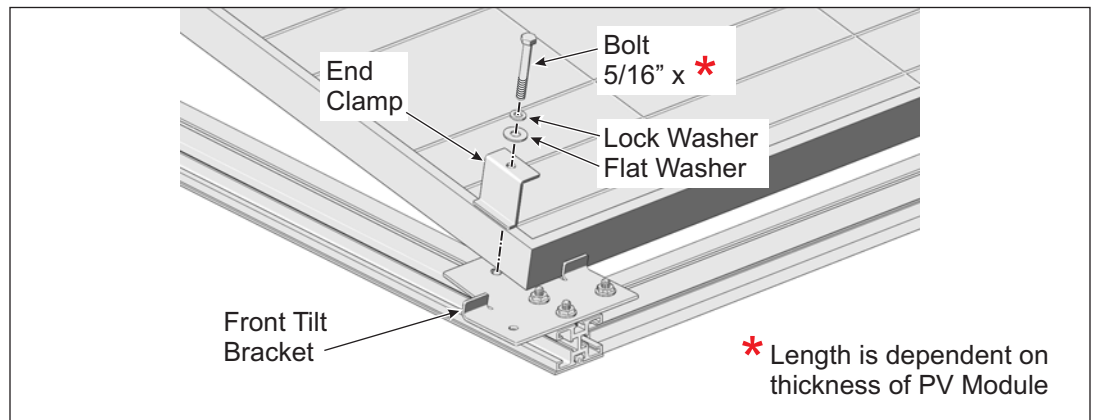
Proper alignment of End Clamps to Front Tilt Bracket and Module
